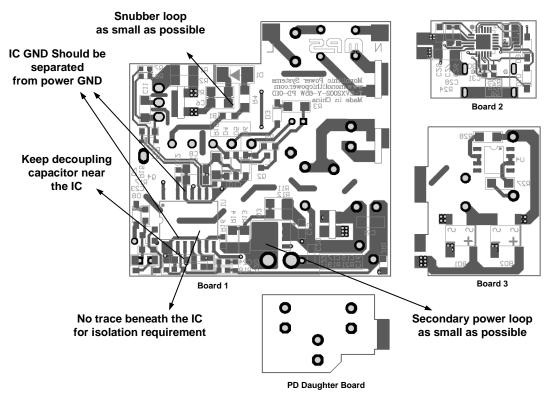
Recommended PCB Layout for 65W PD Adapter Design (Bottom-Side)
